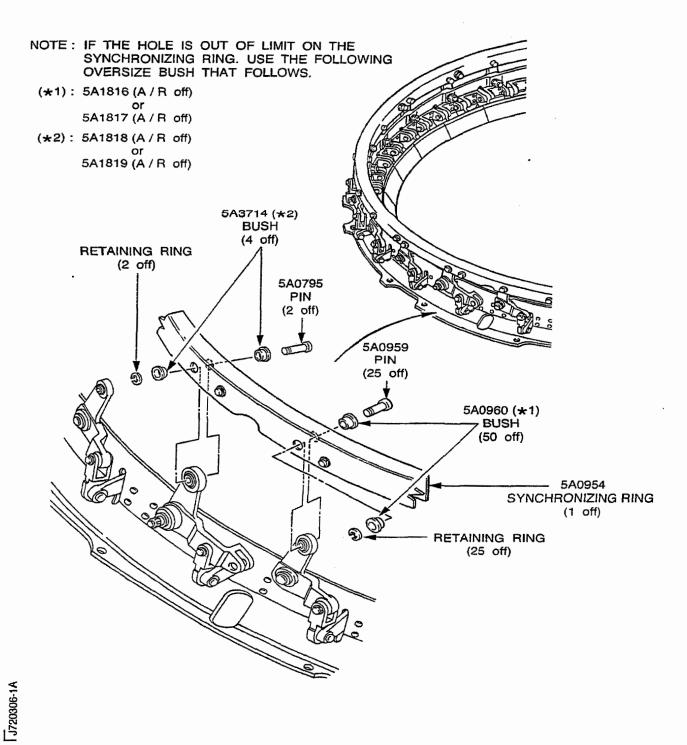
Install the Bushes to the LPC Synchronizing Ring
